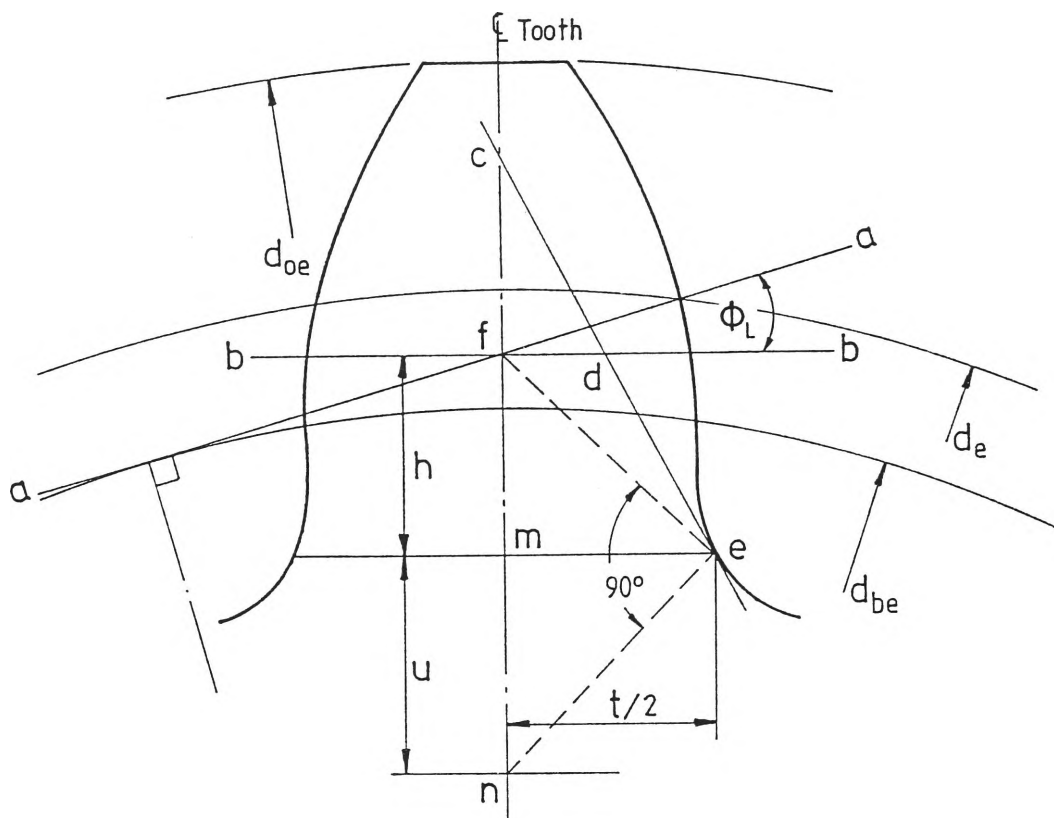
AGMA 218.01 TOOTH DIMENSIONS
